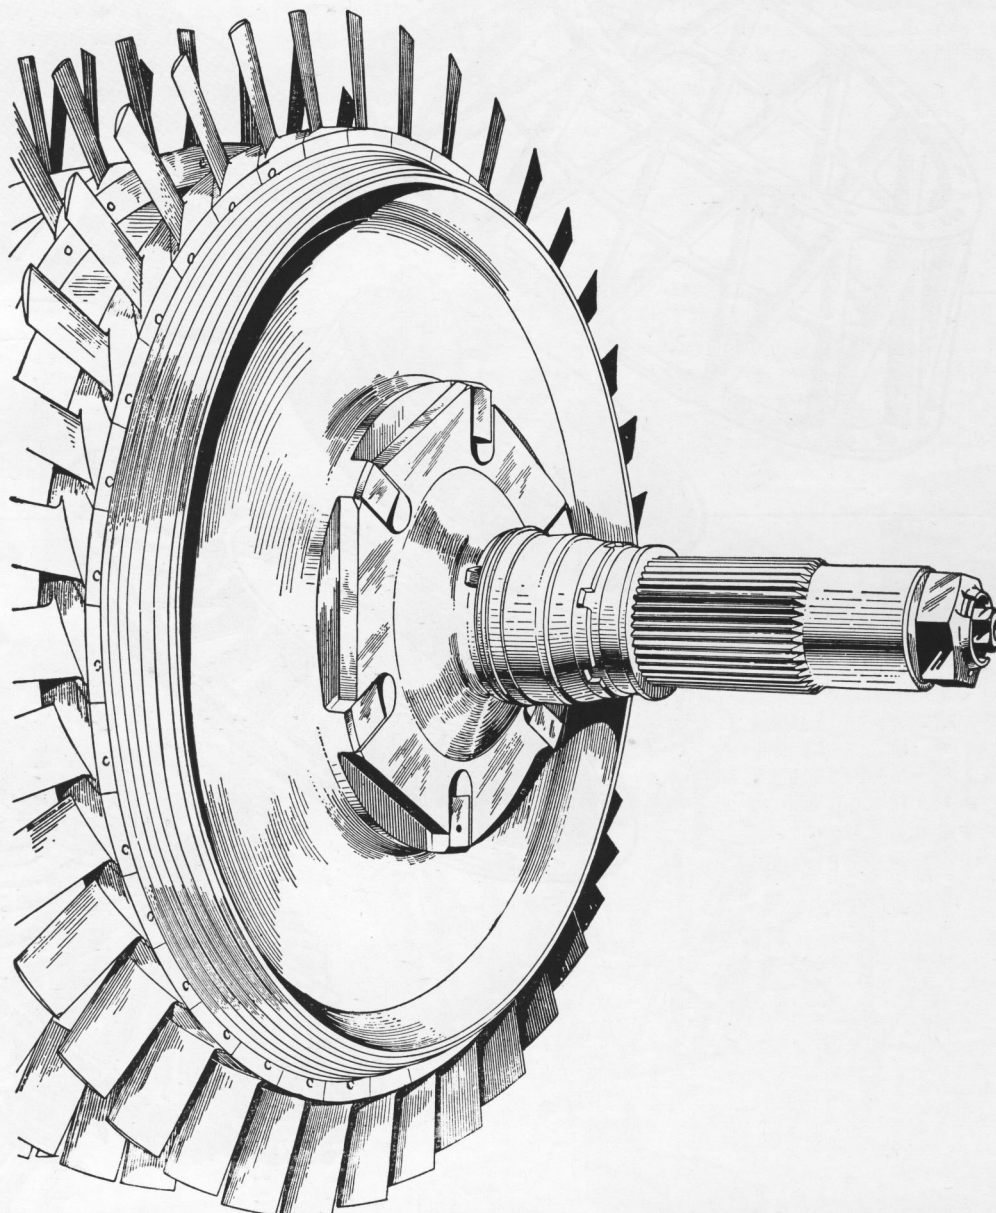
The eighth compressor disk and rotor showing: small retaining screws set in blade roots; serrated ring around which is bled part of the cooling air; and slot-and-lug arrangement for transmitting torque from the drive shaft to the disk faces. The entire compressor assembly is held together by a tie rod, the end of which protrudes from the shaft end (right).
